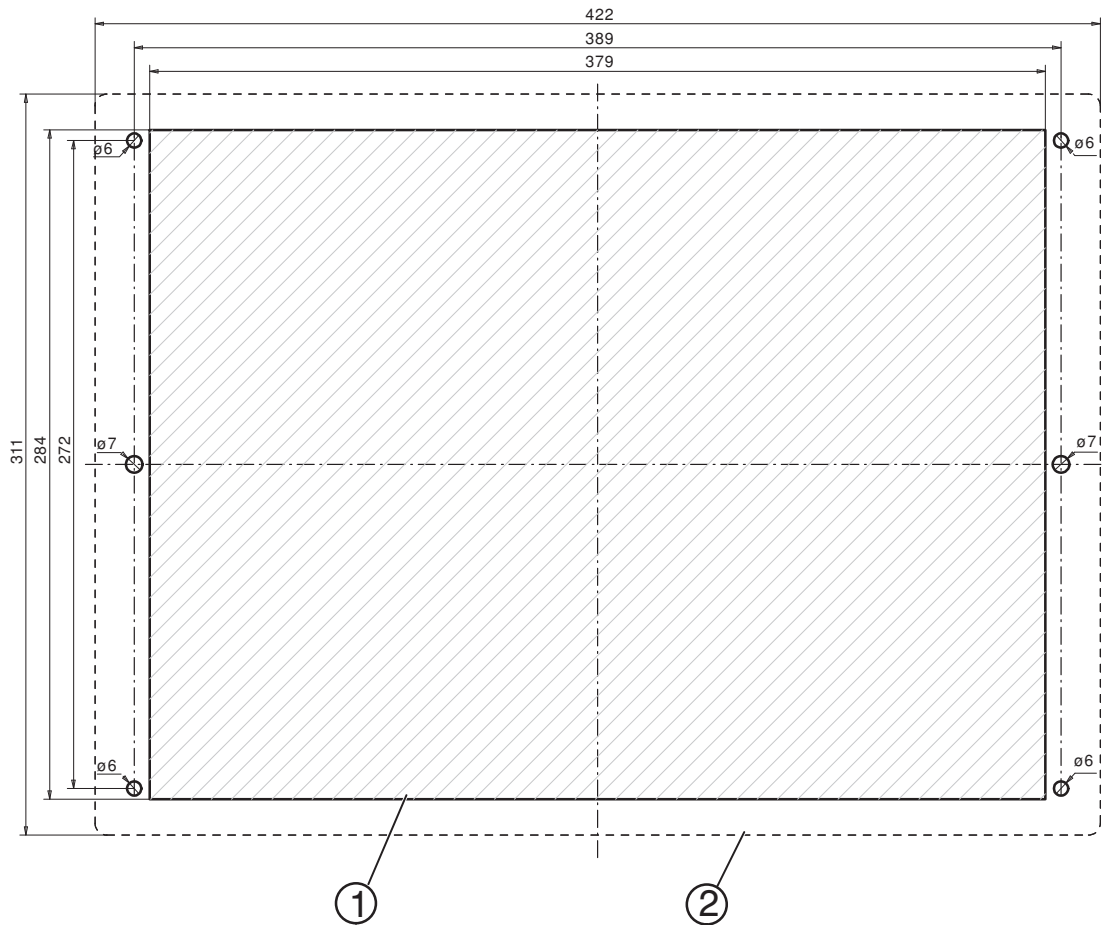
Installation cut-out, P15 front installation enclosure (all dimensions in mm)
